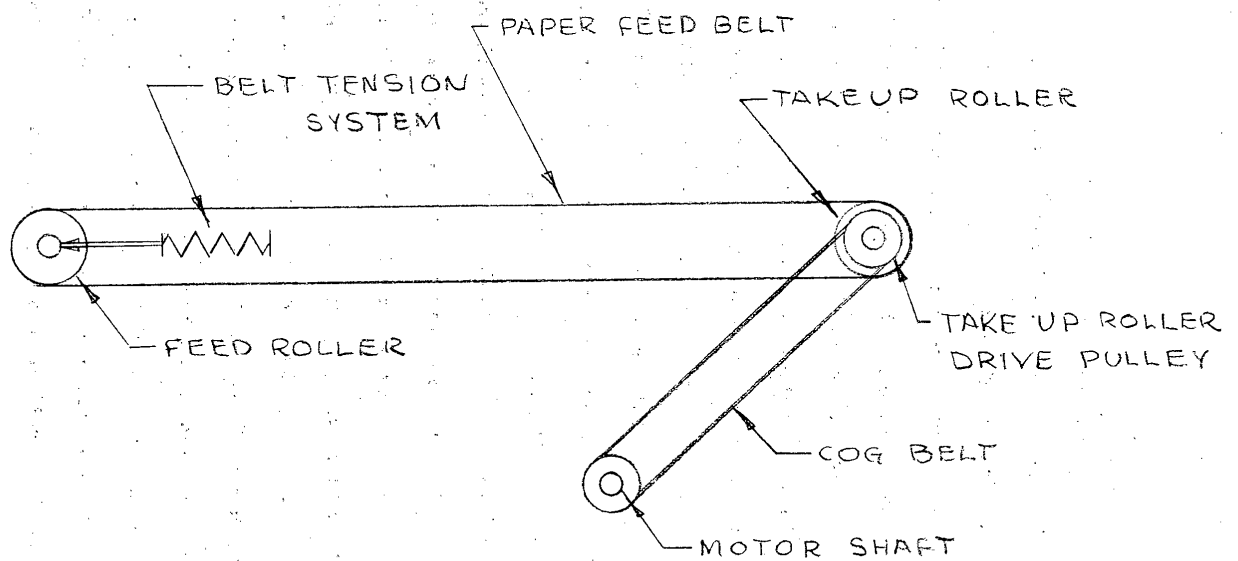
COG BELT DRIVE FOR PAPER FEED BELT ROLLERS
